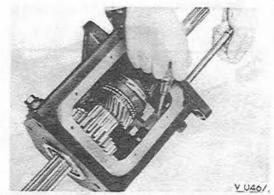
Installing the gear shift fork shaft in the transmission case.
